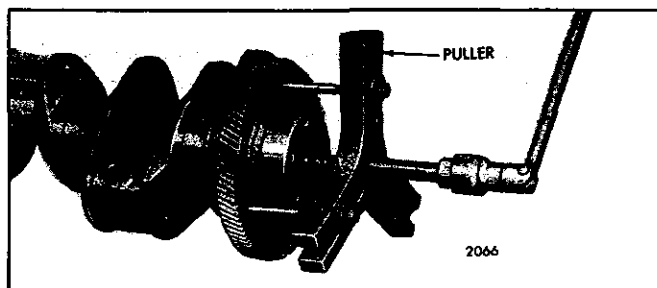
Removing Crankshaft Timing Gear with Puller J 4871
